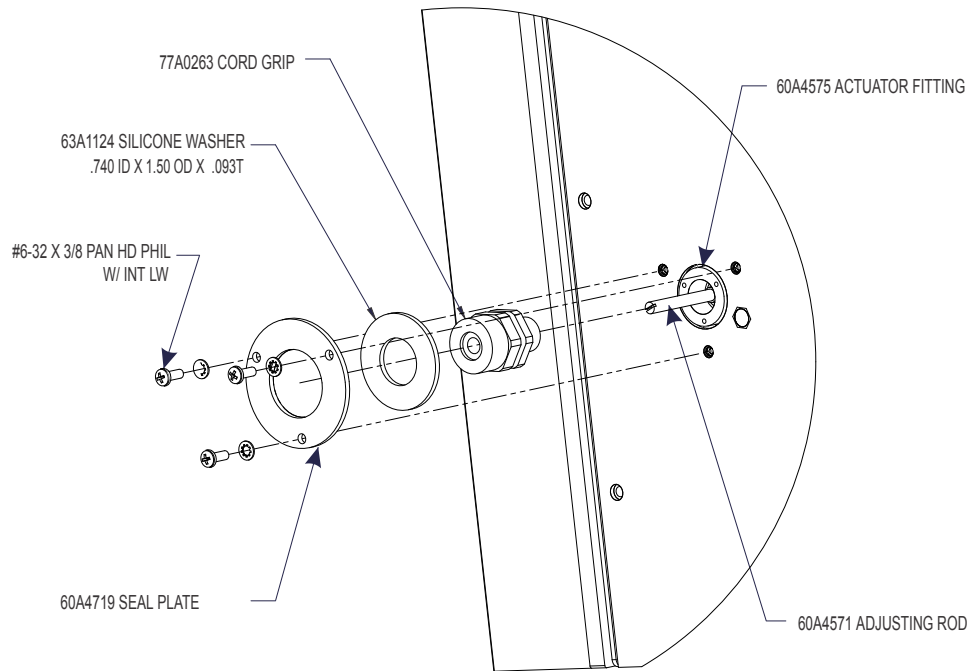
Reassembly of the Baffle Actuator Fitting (configuration 1)
